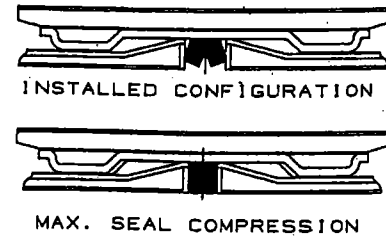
Cross section view of a composite mechanical coupler assembly showing joint end positions during extremes of structural length changes
